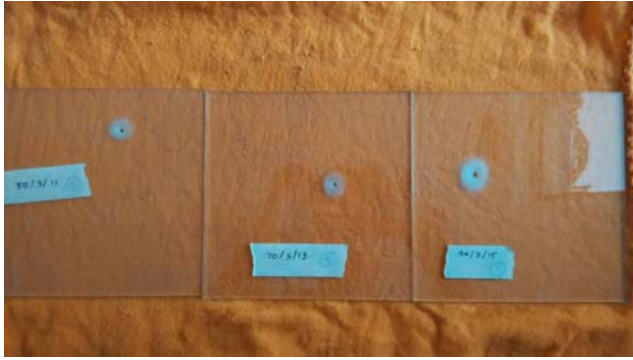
Specimen after machining 150 mm*150 mm*3 mm
